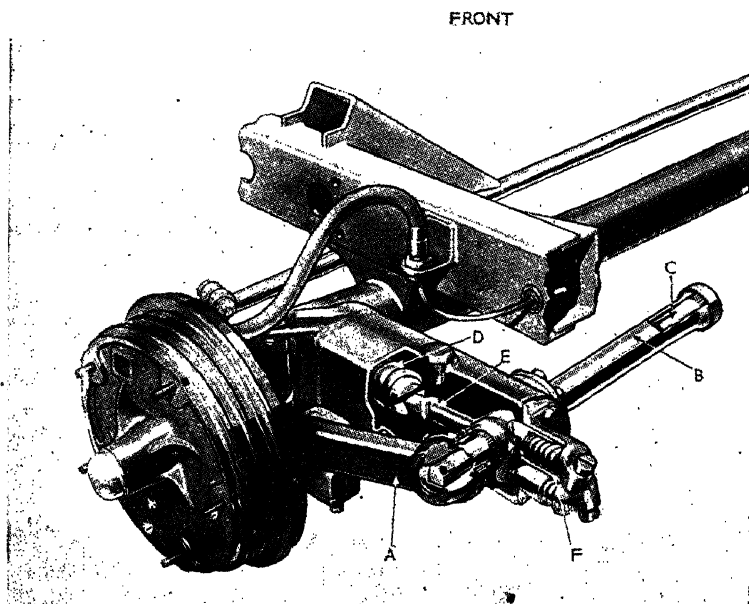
Vauxhall Independent Front Wheel System, with Torsion Bar Springing.
